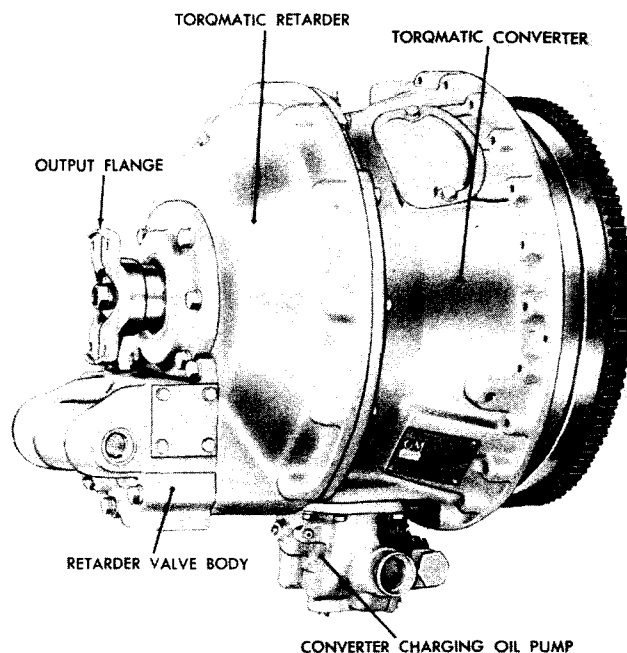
Torqmatic converter with Torqmatic retarder, right-rear view
